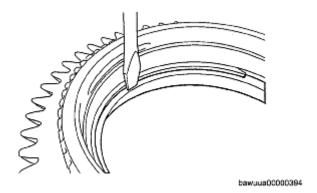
Removing Bearing Race Outer From Counter Drive Gear Courtesy of MAZDA MOTORS CORP.
